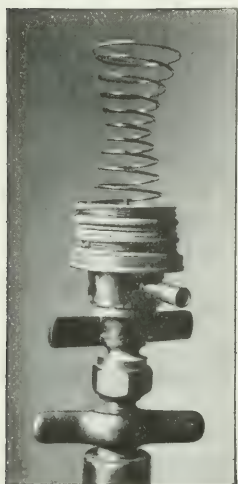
REGULATOR WITH SPIRAL SPRING: CAP REMOVED.
